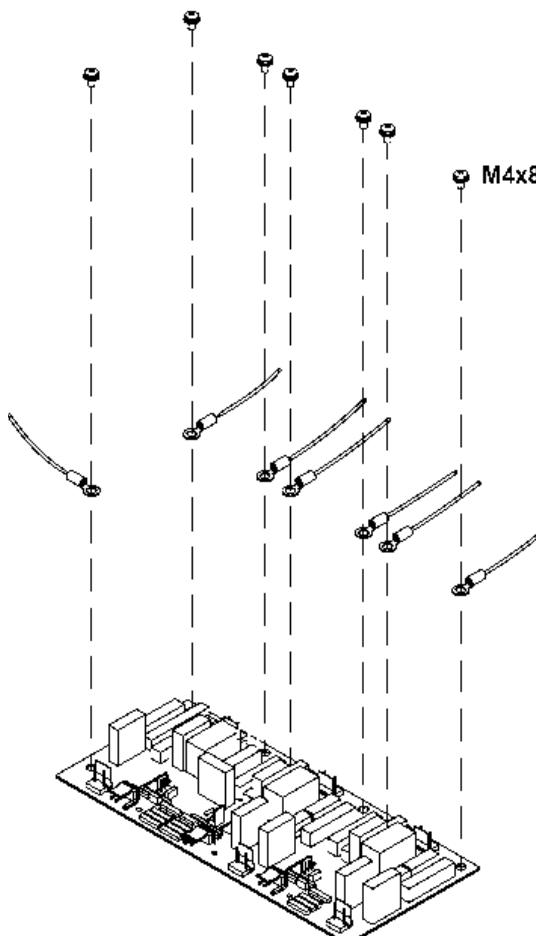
(a) Disassembly of the Snubber, Trigger and soft charge protection
